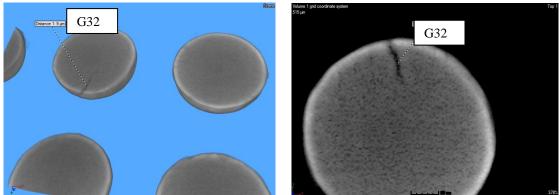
CT Image for BGA Crack with 9 µm
